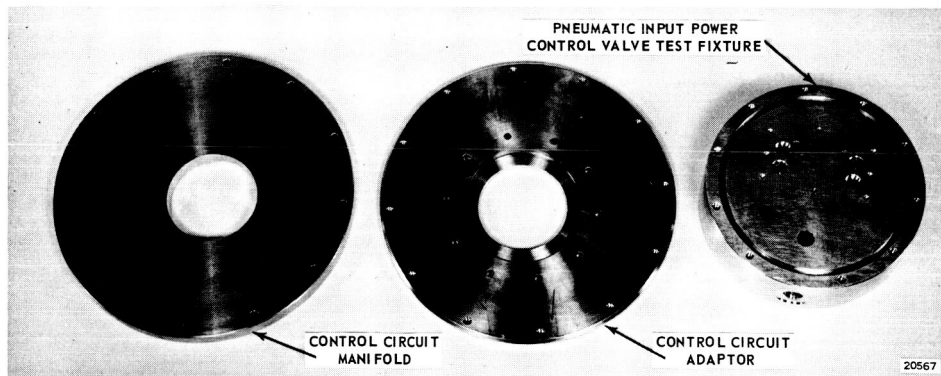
Power Control Valve Test Fixture and Control Circuit Adaptors
